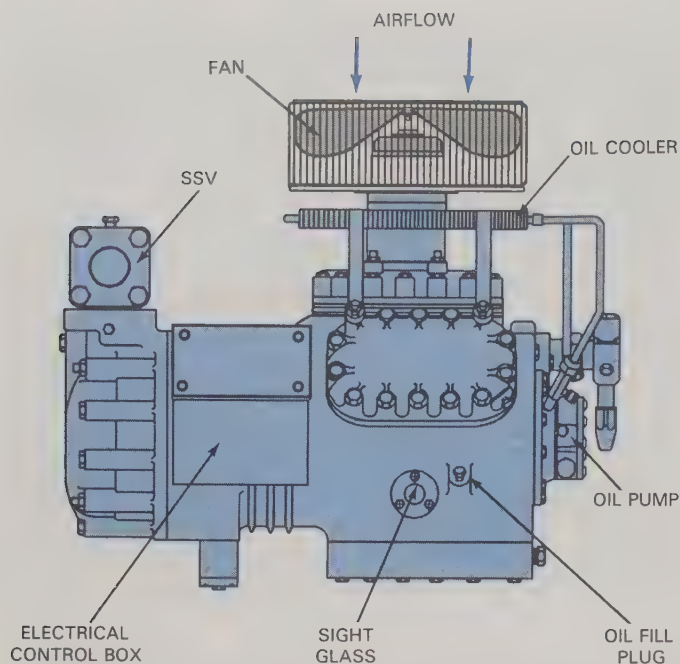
Multiple-head compressors are often cooled by a fan blowing air directly down on the heads.
